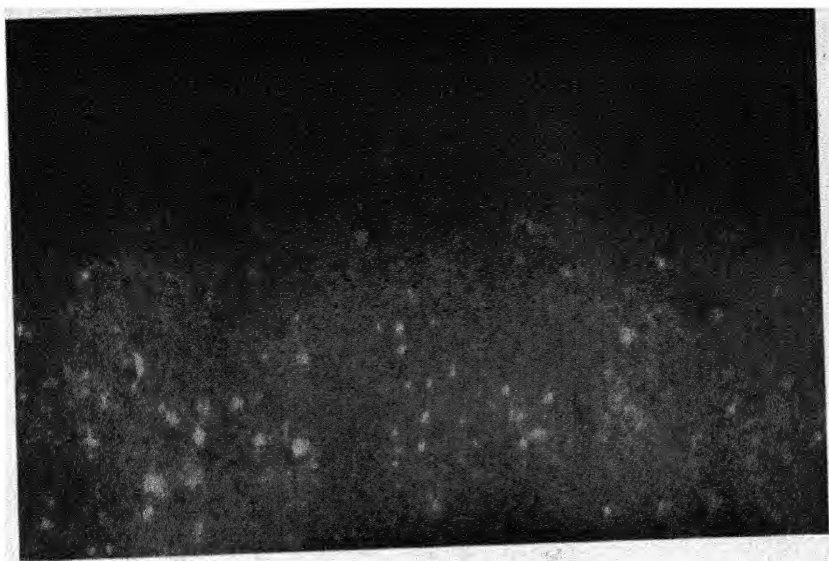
Radiograph of weld made with too lightly coated electrode.
